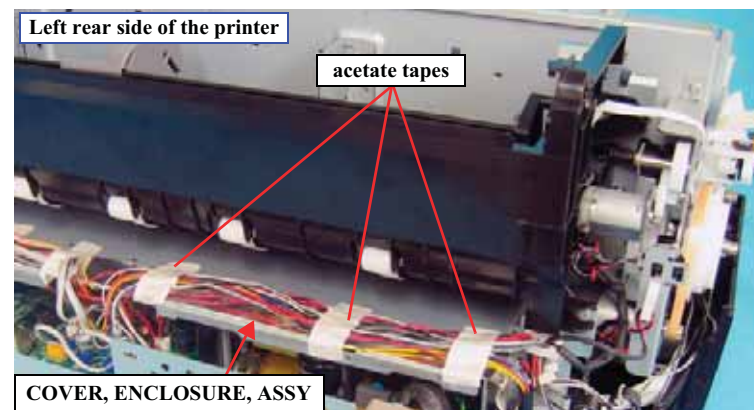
Releasing the MOTOR, RELEASE, ASSY. Cables (1)
